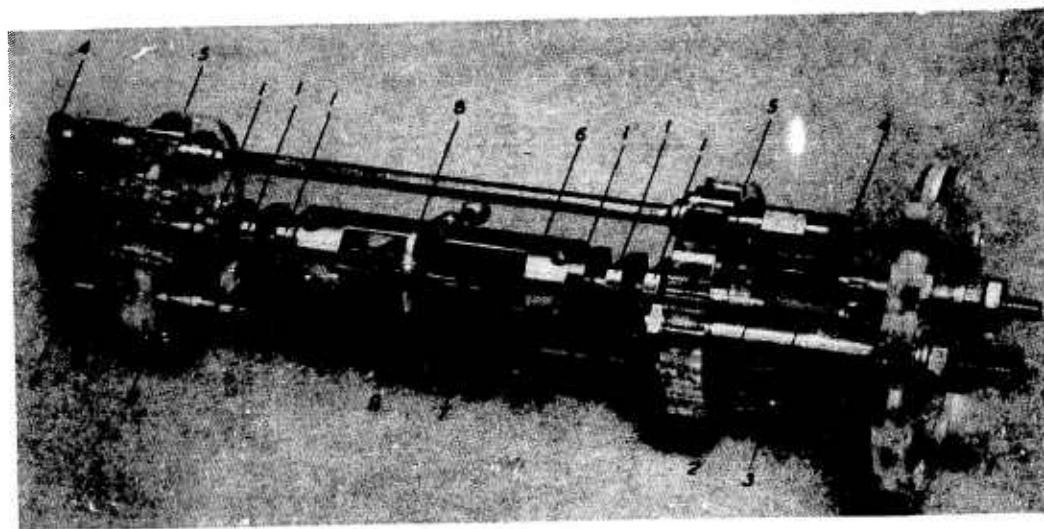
Magnet system and supporting frame of firing device (magnets, 1; tubular shafts, 2; suspension wires, 3; tension springs, 4; plastic plates, 5; tubular hub, 6; vane, 7; insulated arm, 8; contact arm, 9).
